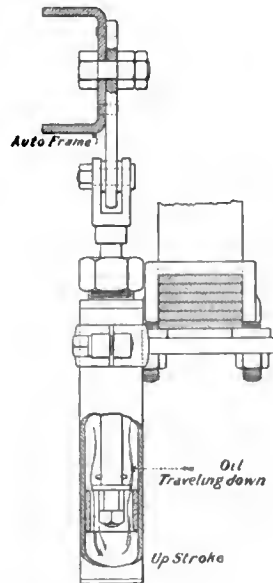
FOSTER HYDRAULIC RECOIL CHECK.
